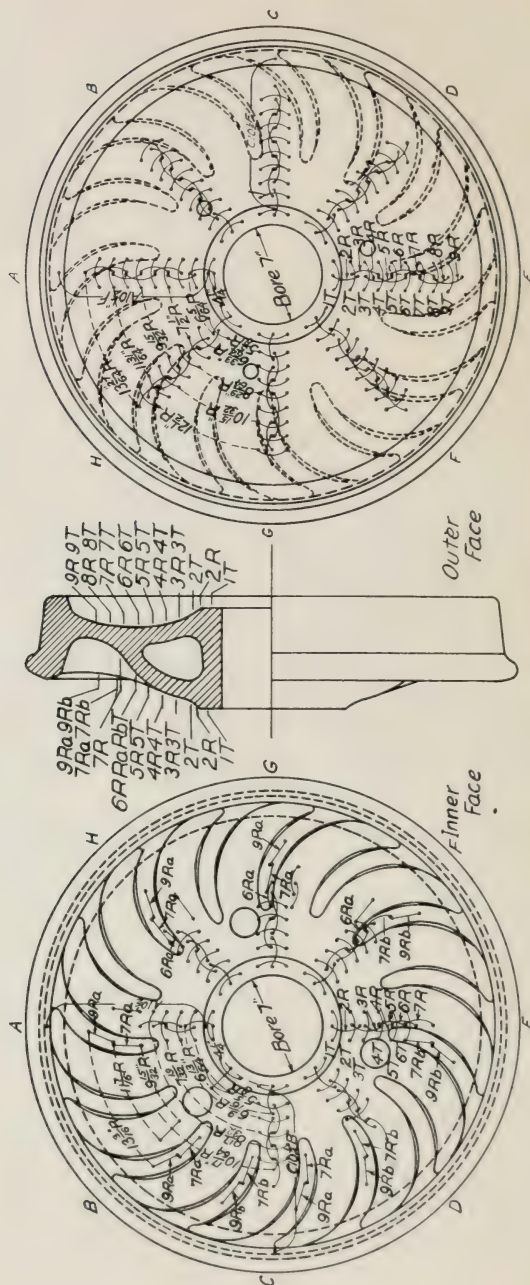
LOCATION OF GAGE-LINES ON 33-IN. 740-LB ARCH PLATE WHEEL NO. 04 474
